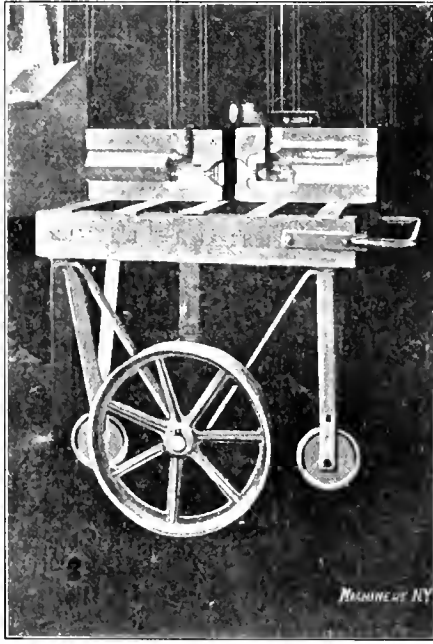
Dies in which a Boring Tool Shank is forged, and a Convenient Form of Shop Truck
